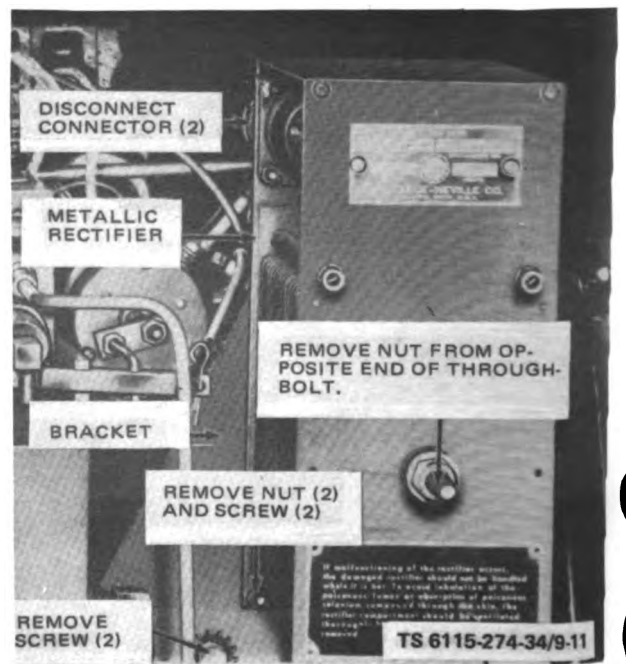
Metallic Rectifier and Bracket, Removal and Installation
